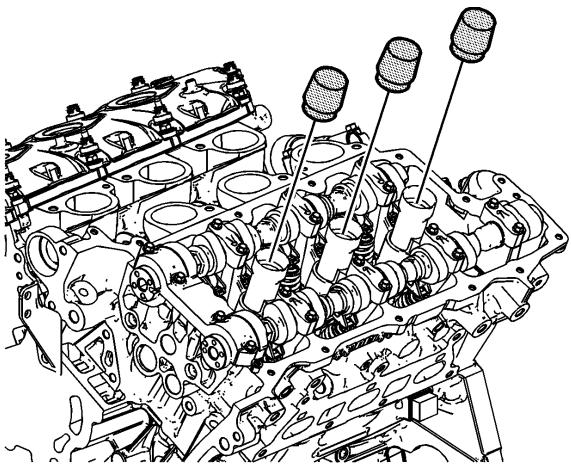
Identifying Camshaft Cover Seal & Grommets
